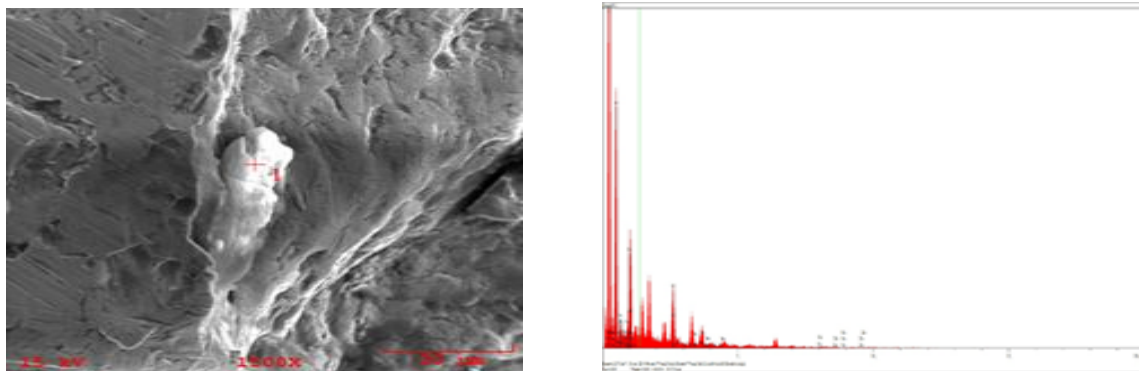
High magnification worn flank surface SEM pictures with EDX analysis of the D2 tool steel punch
